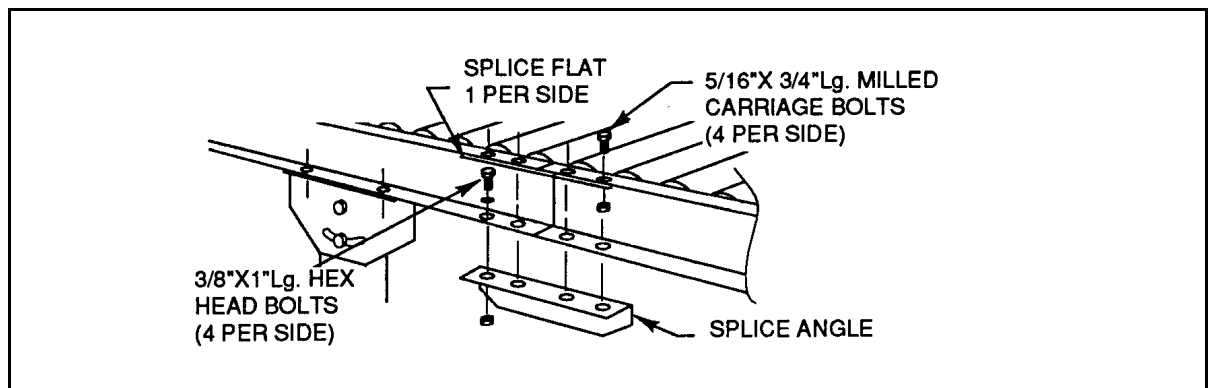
Use Splice Angle Assembly at Splice Point When Floor Support or Ceiling Hanger Must Be Offset
